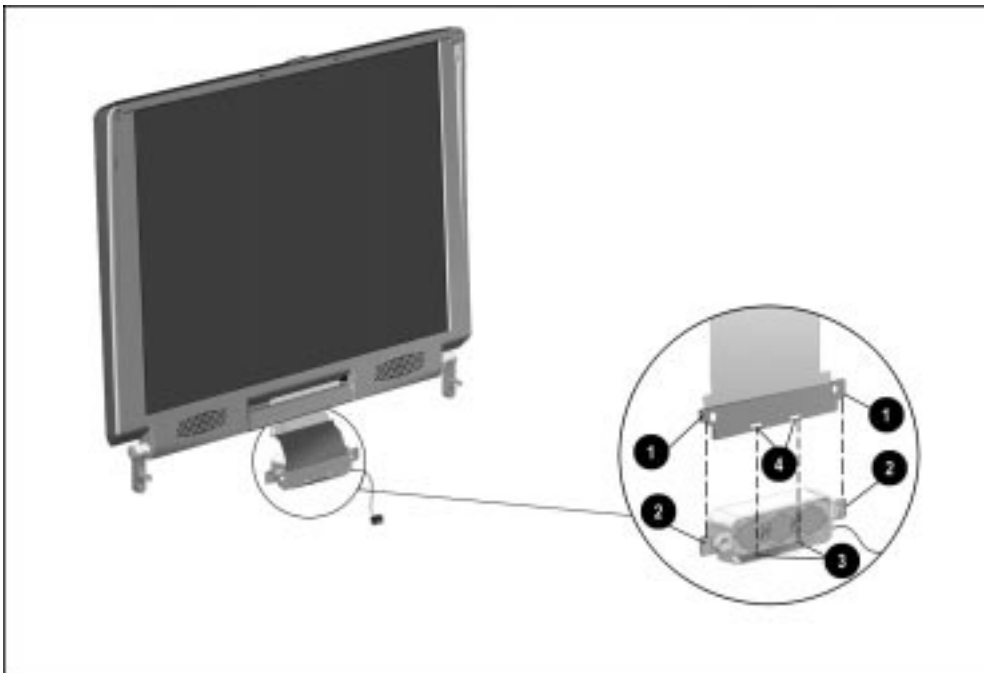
Attaching the Display Ground Cable to the Auxiliary Battery Assembly
